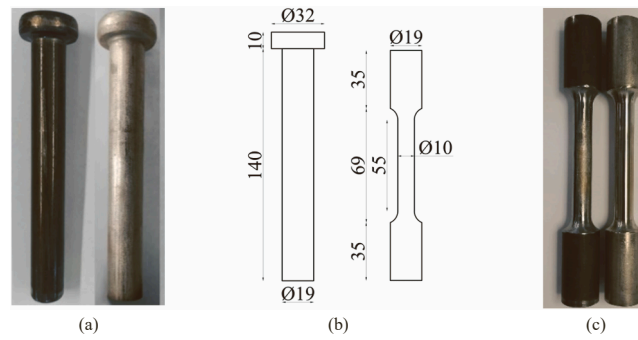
(a) Left to right: Carbon steel SD1 and austenitic EN 1.4301 stainless steel SD3; (b) Geometry of the headed studs and tensile coupon specimens (dimensions in mm); (c) Photograph of machined tensile coupon specimens.
